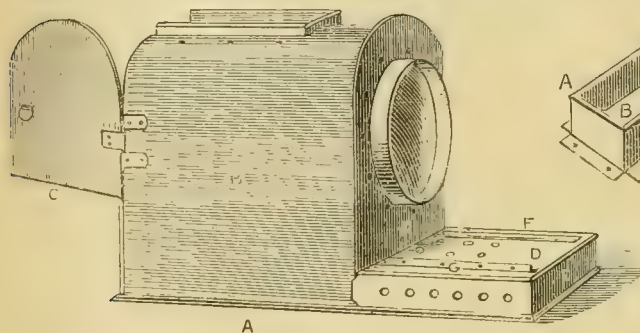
PERSPECTIVE VIEW OF LANTERN WHEN FINISHED.
